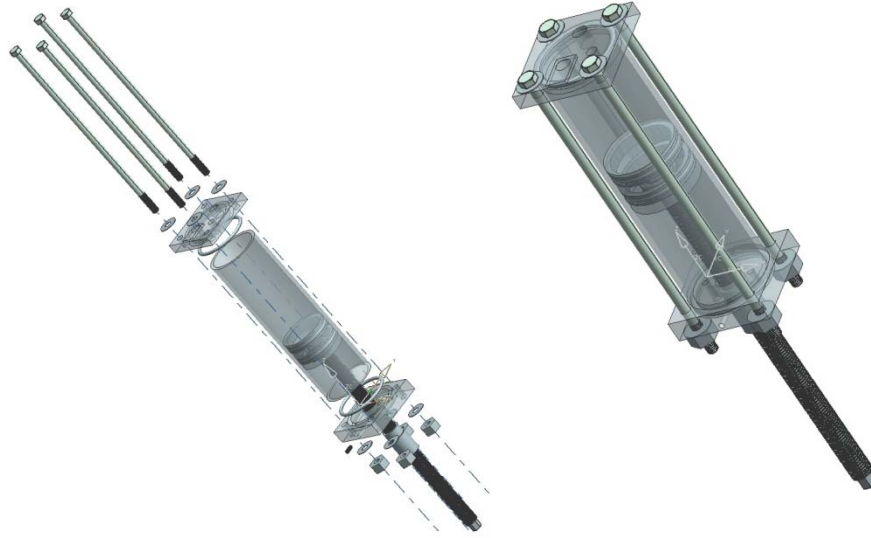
Main device assembly, exploded view (left), assembled (right)
